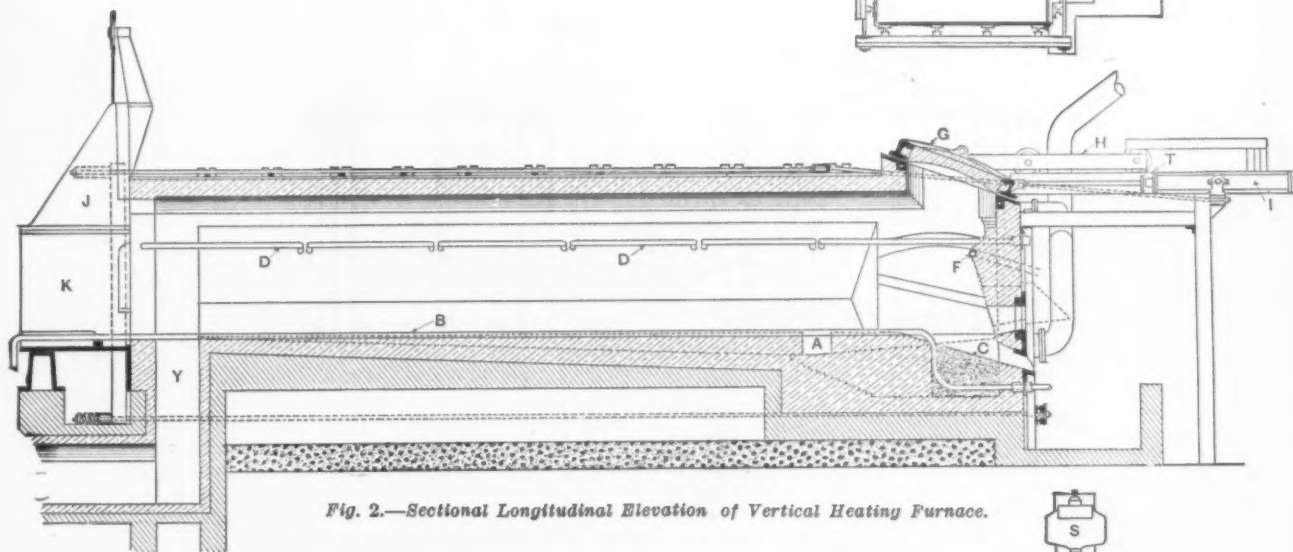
Sectional Longitudinal Elevation of Vertical Heating Furnace.
